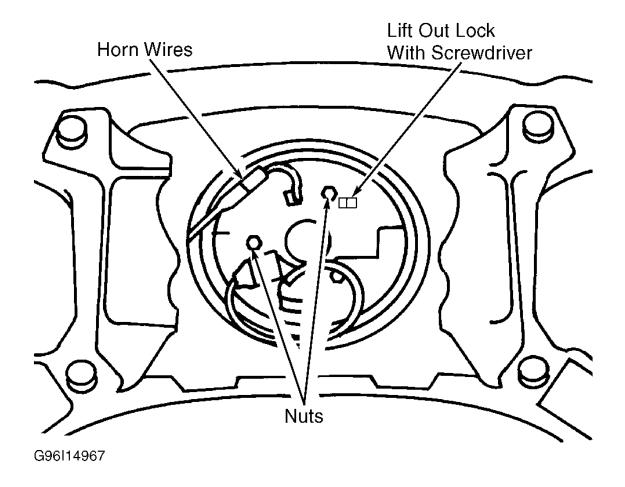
Removing Contact Ring From Steering Wheel Courtesy of BMW OF NORTH AMERICA, INC.
